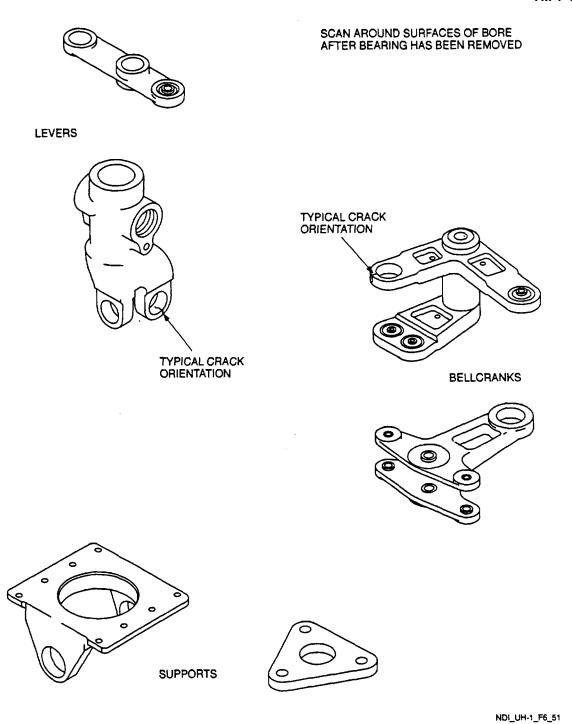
Elevator Control System - Bellcranks, Levers, and Supports - Bearing Replacement
